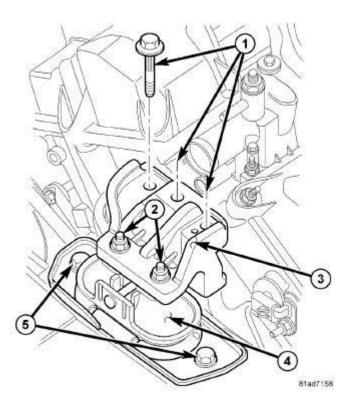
Right Engine Mount Courtesy of CHRYSLER LLC
